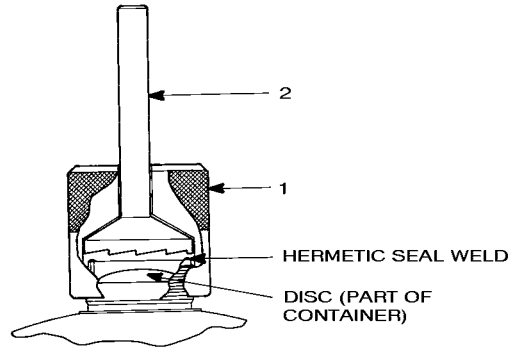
Disc Assembly Weld-Machining Tool
